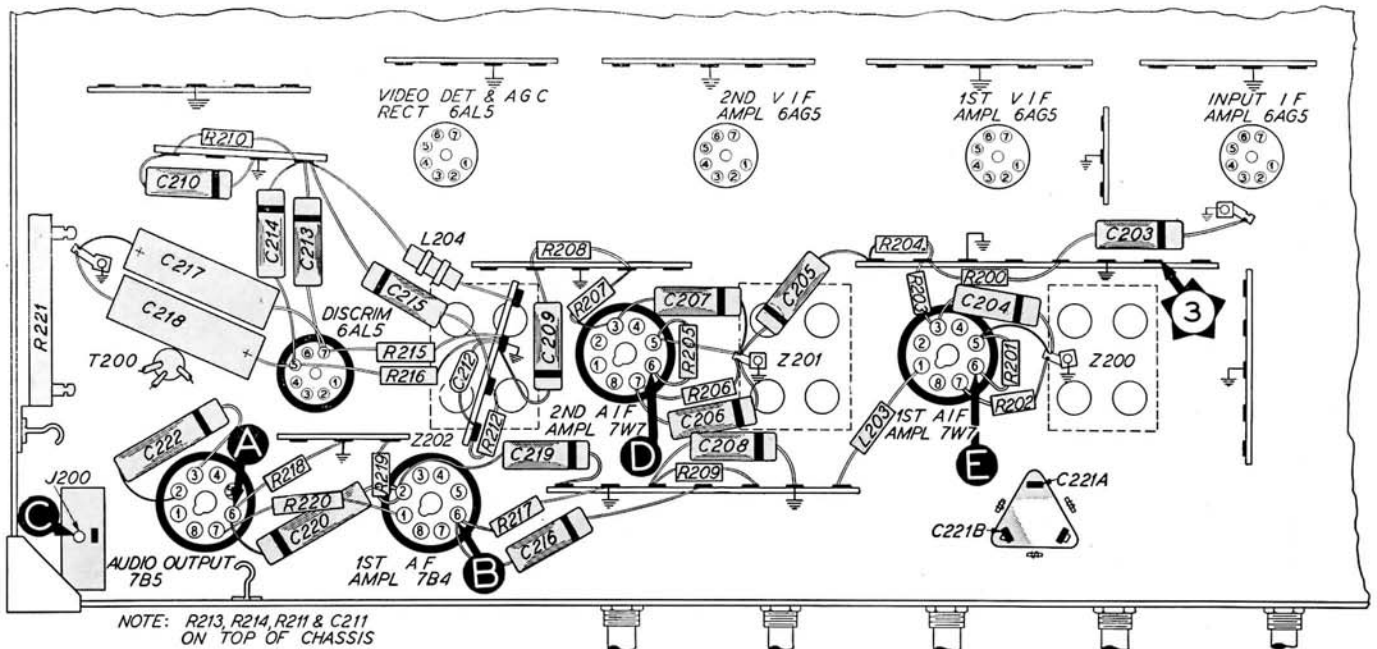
Bottom View of Chassis, Showing Section 2 Test Points
